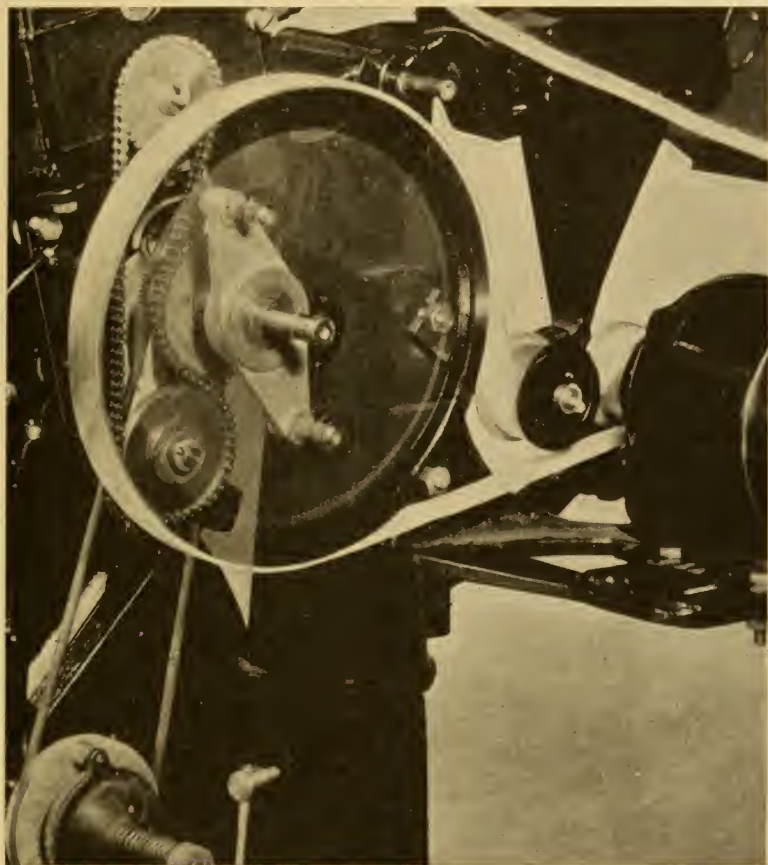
Double exposure photograph showing mechanical details of a projector and sound drive.
